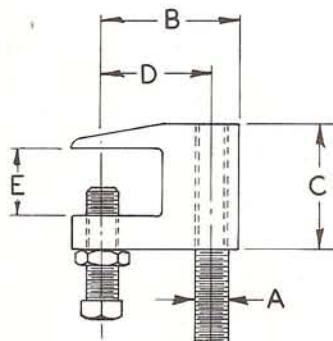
Top Beam Clamps are to be used on the top sections of beams and bar joists, where the roof rests flat on top of the beam.
